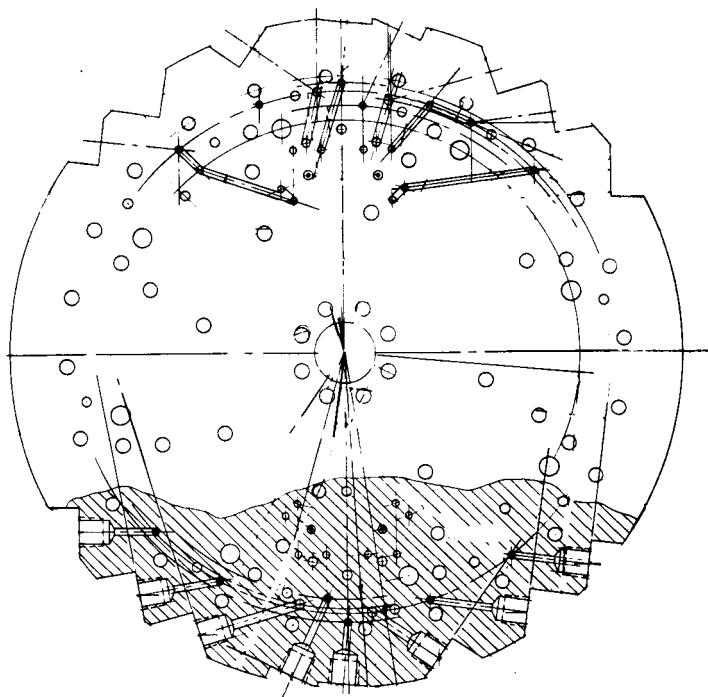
(b) POWER SELECTOR VALVE TEST PLATE, NPX-104-65, BOTTOM
